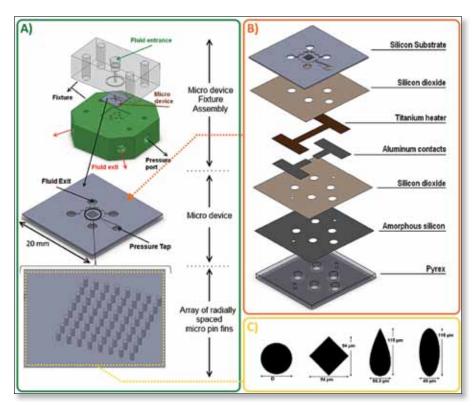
a) CAD illustration of micro device (micro-cooler); b) Exploded CAD view of micro device; c) Micro pin fin geometries with dimensions, $D = 50 - 125 \mu m$.
